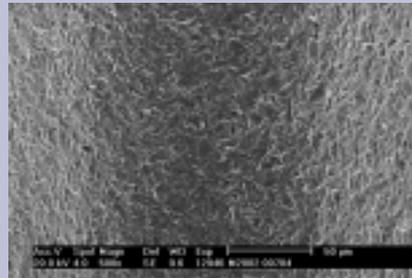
Surface defect on threads; magnification 50x.
